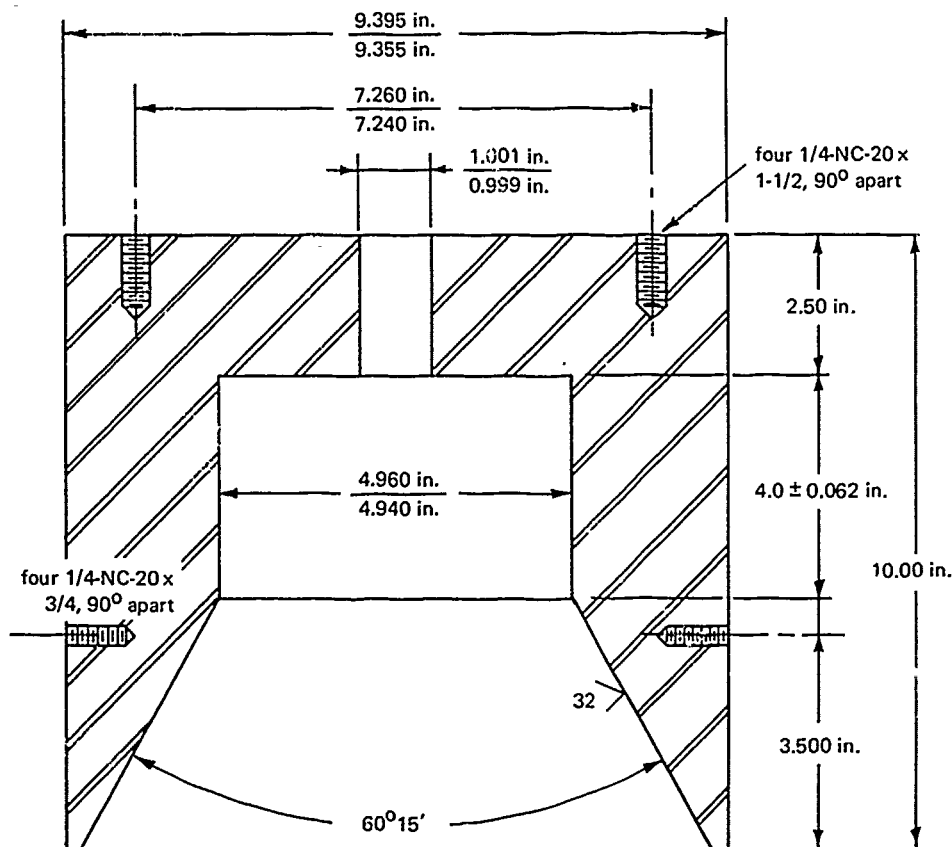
Dimensions of flange for testing windows with R_i of 6.200 inches and 60-degree spherical sector angle.
